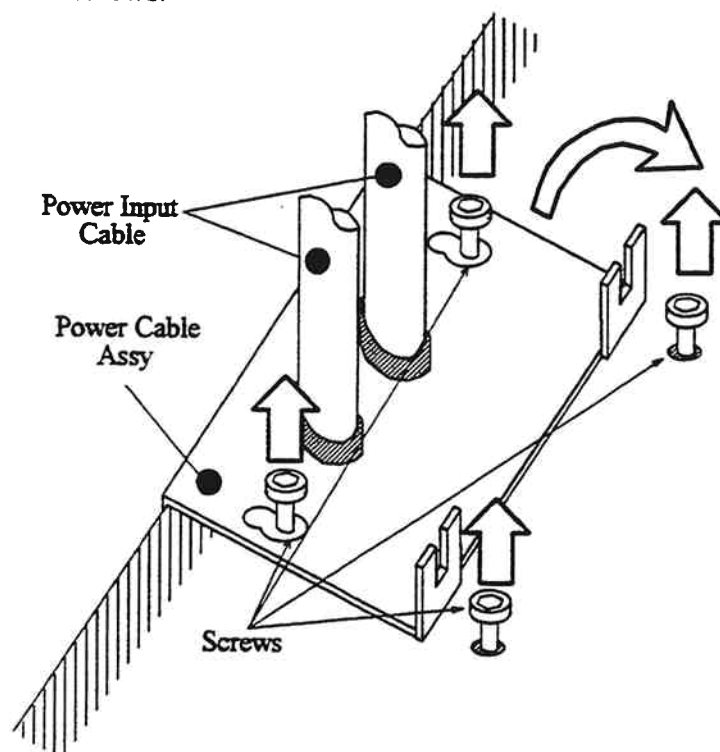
Fixing of Power Cable Assy
